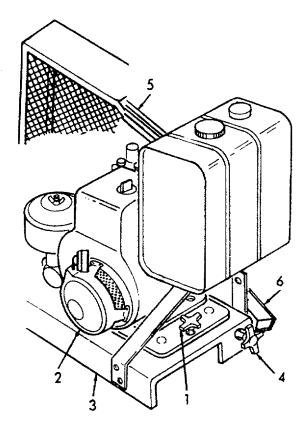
Compressor Drive Belt Tension Adjustment.
